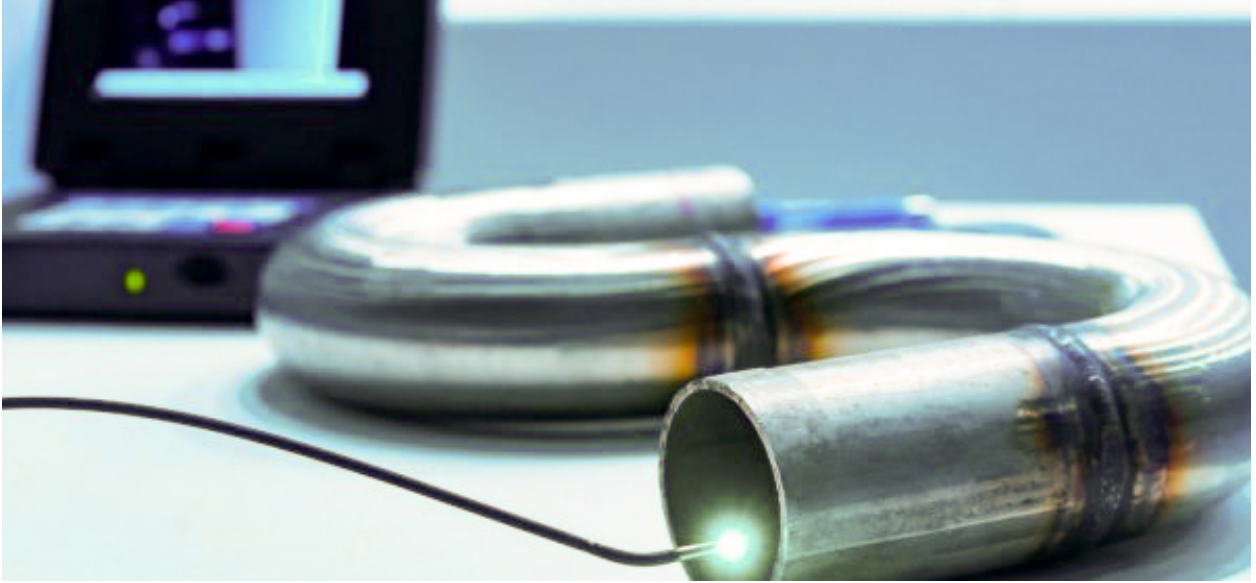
Pure borescope tube inspection example [1].
